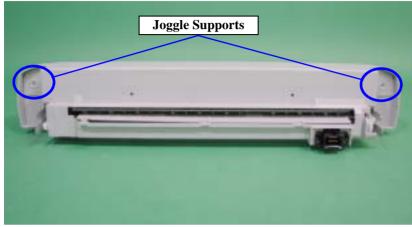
Joggle Supports That Secure the Cutter Housing
